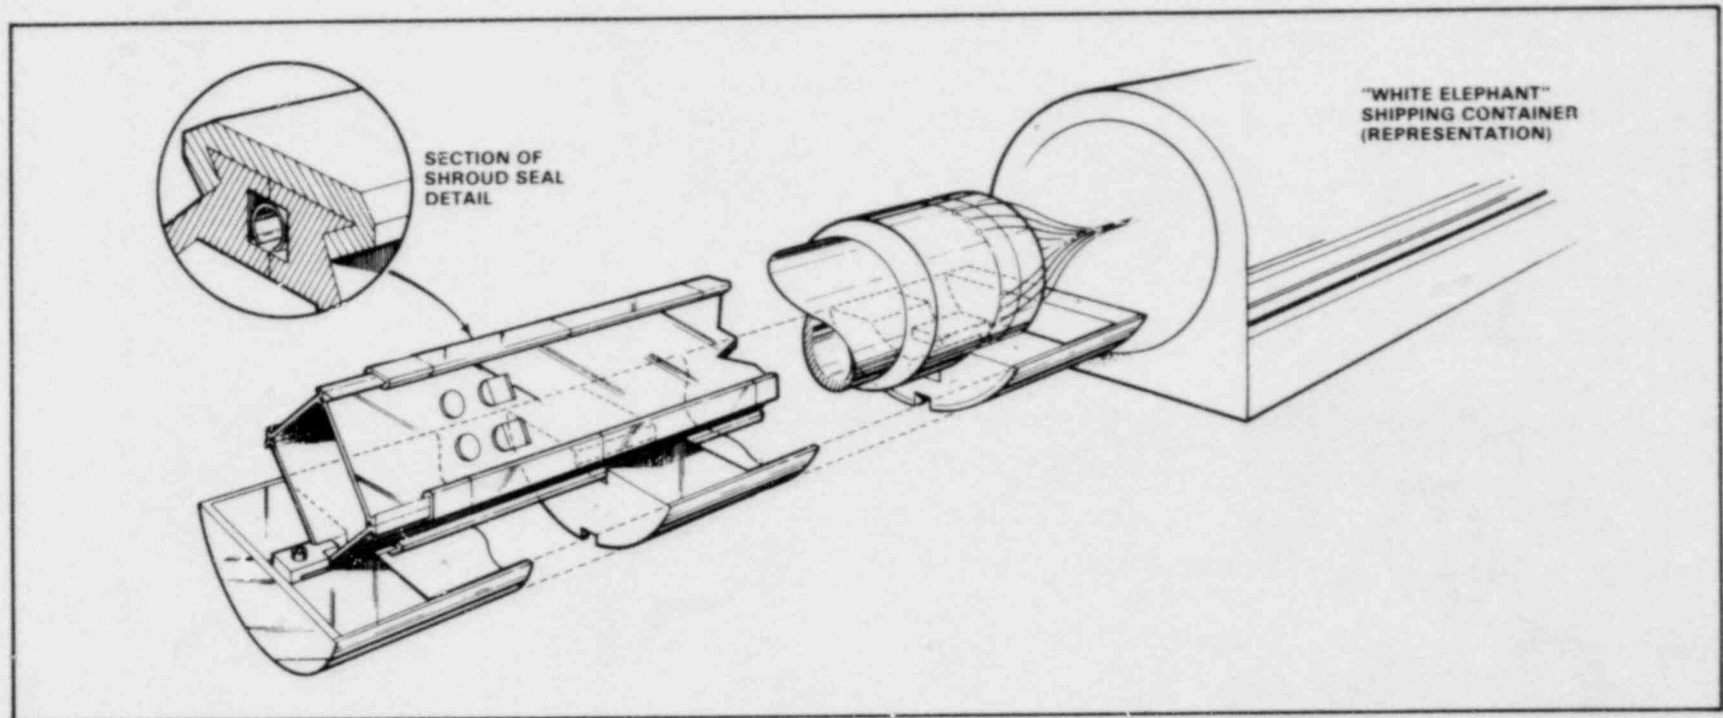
Shipping Fixture to Transfer Bundle Containing Irradiated Rods from Hot Cell to Basin
